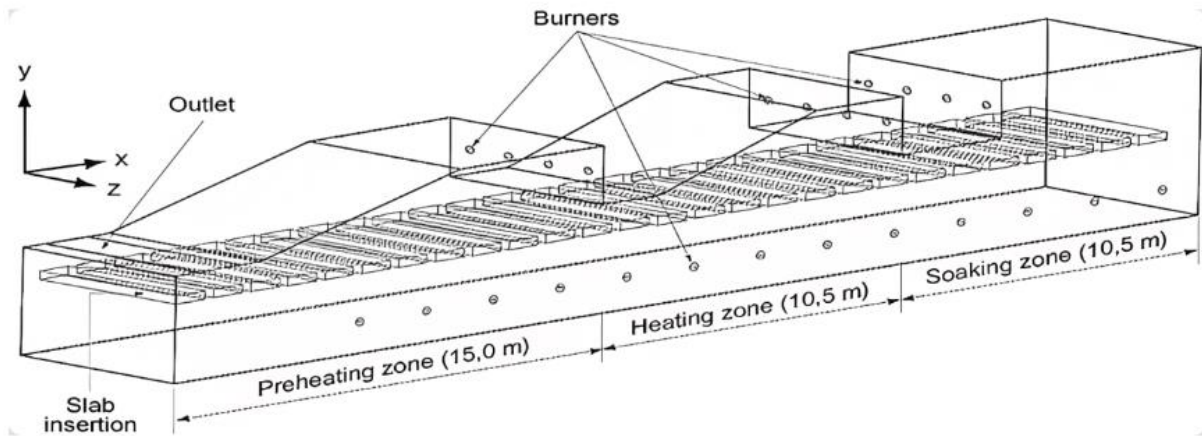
Schematic of Walking beam type reheating furnace (WB furnace) without skid beam arrangement [6]
